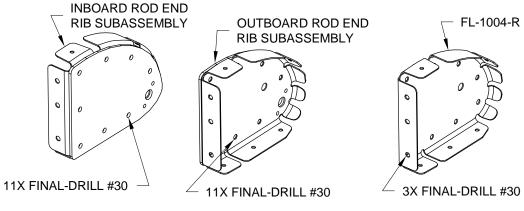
FINAL-DRILL NOSE RIBS AND ROD END RIB SUBASSEMBLIES - RIGHT FLAP
